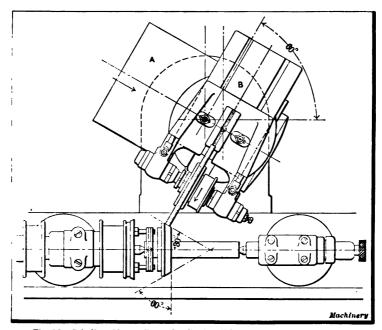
Grinding Abrupt Taper by Setting Wheel-slide to Required Angle
